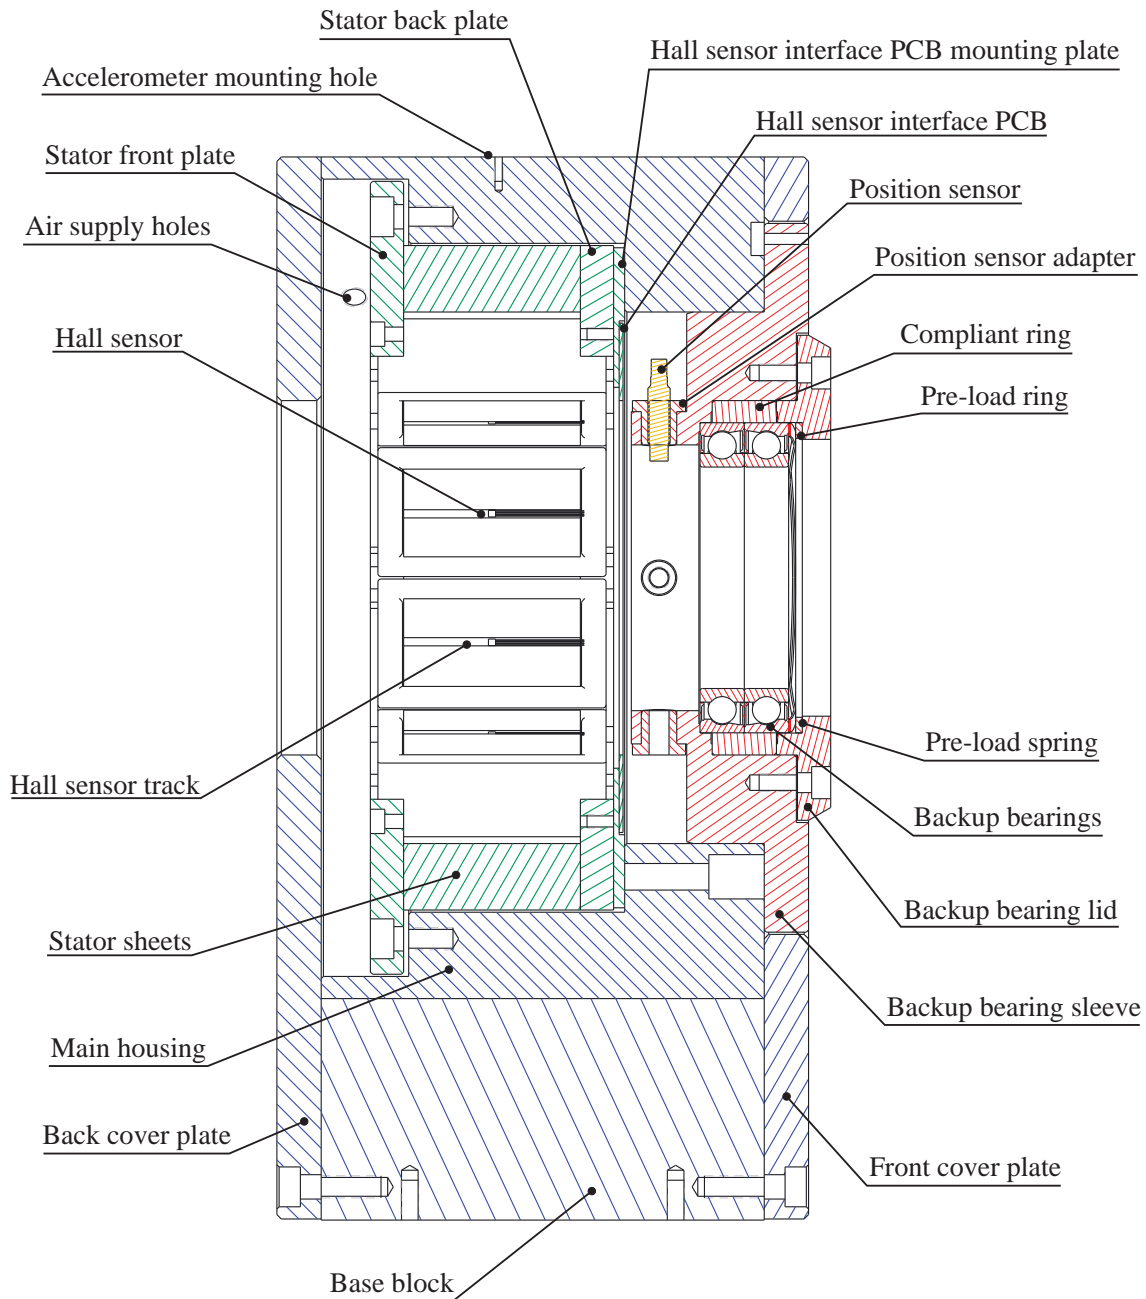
AMB section view showing components. Colour scheme indicates component groups.
